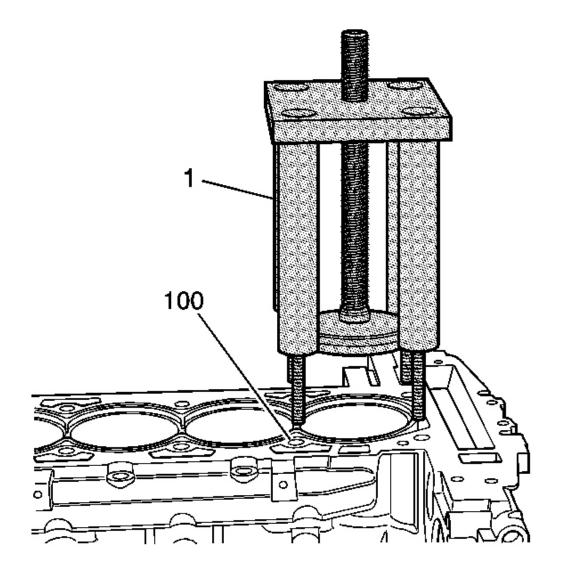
View Of Service Tool Assembly Courtesy of GENERAL MOTORS CORP.
